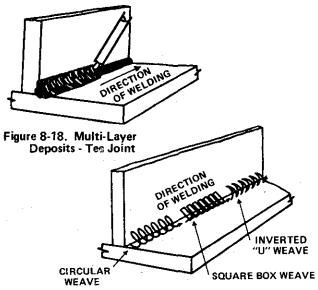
Tee Joint Fillet Weld Weave Patterns
